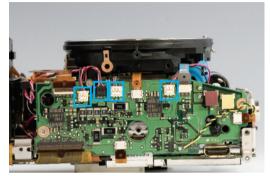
Position of Bottom PCB Ass'y Lead Wires
